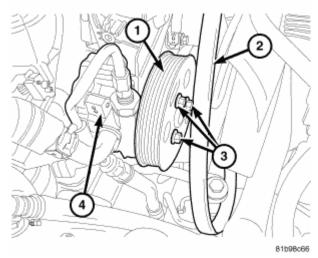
Identifying Pulley, Serpentine Drive Belt, Bolts & Pump Courtesy of CHRYSLER LLC
